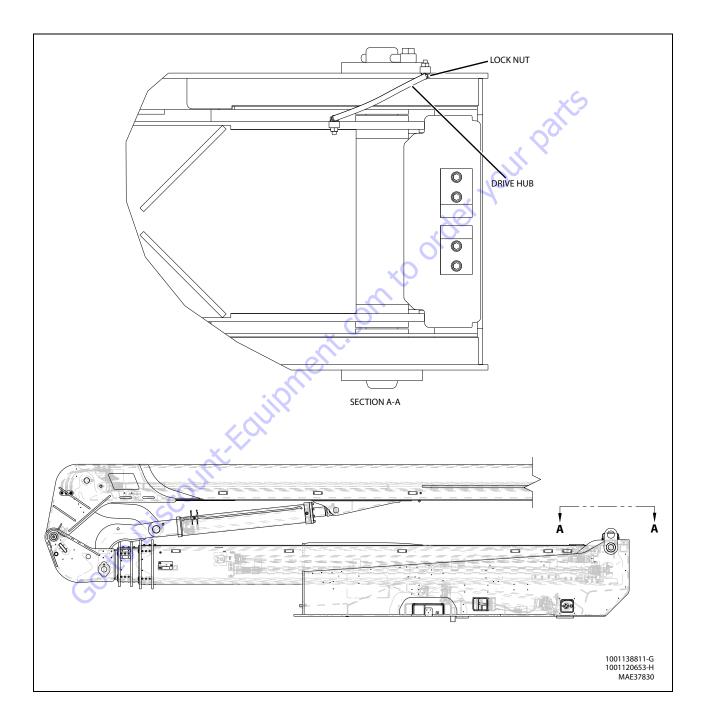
Boom & Cylinder Installation - Sheet 1 of 4
